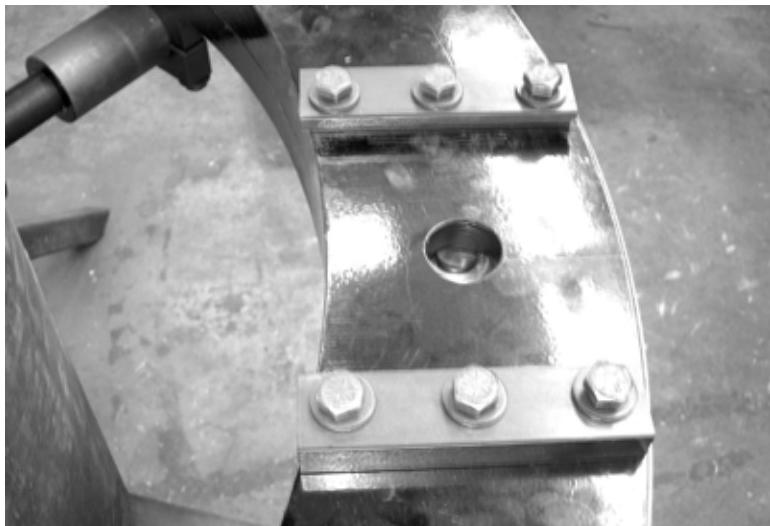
Install the slide mounting blocks on the rotating ring. Leave the mounting bolts loose.
